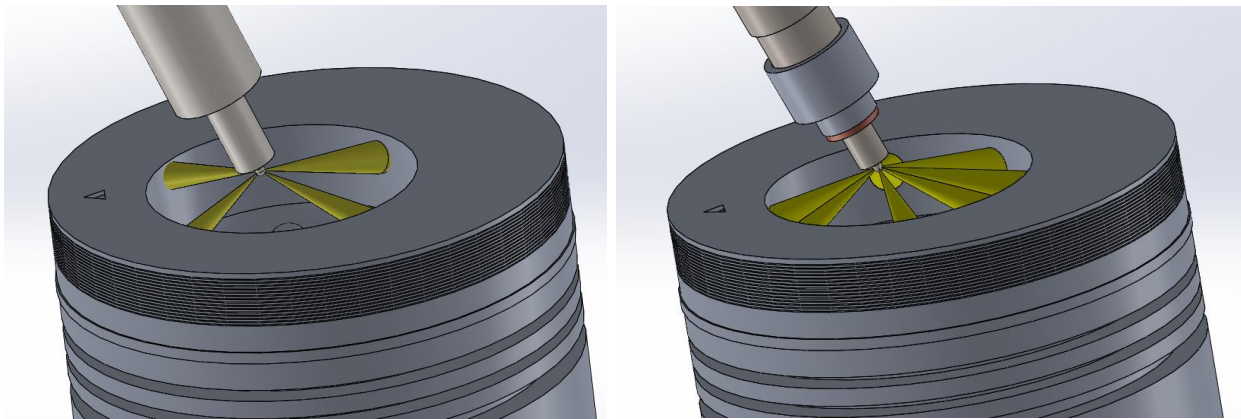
A 3-D Cross Section of a New Fuel Injector Adapted to the Original Cylinder Head
